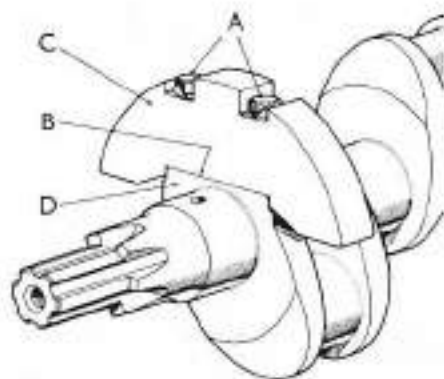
When counterbalance (C) retaining cap screws (A) are properly tightened, gap (B) between counterbalance weight and crankshaft (D) should not permit entry of 0.002 feeler gage.
